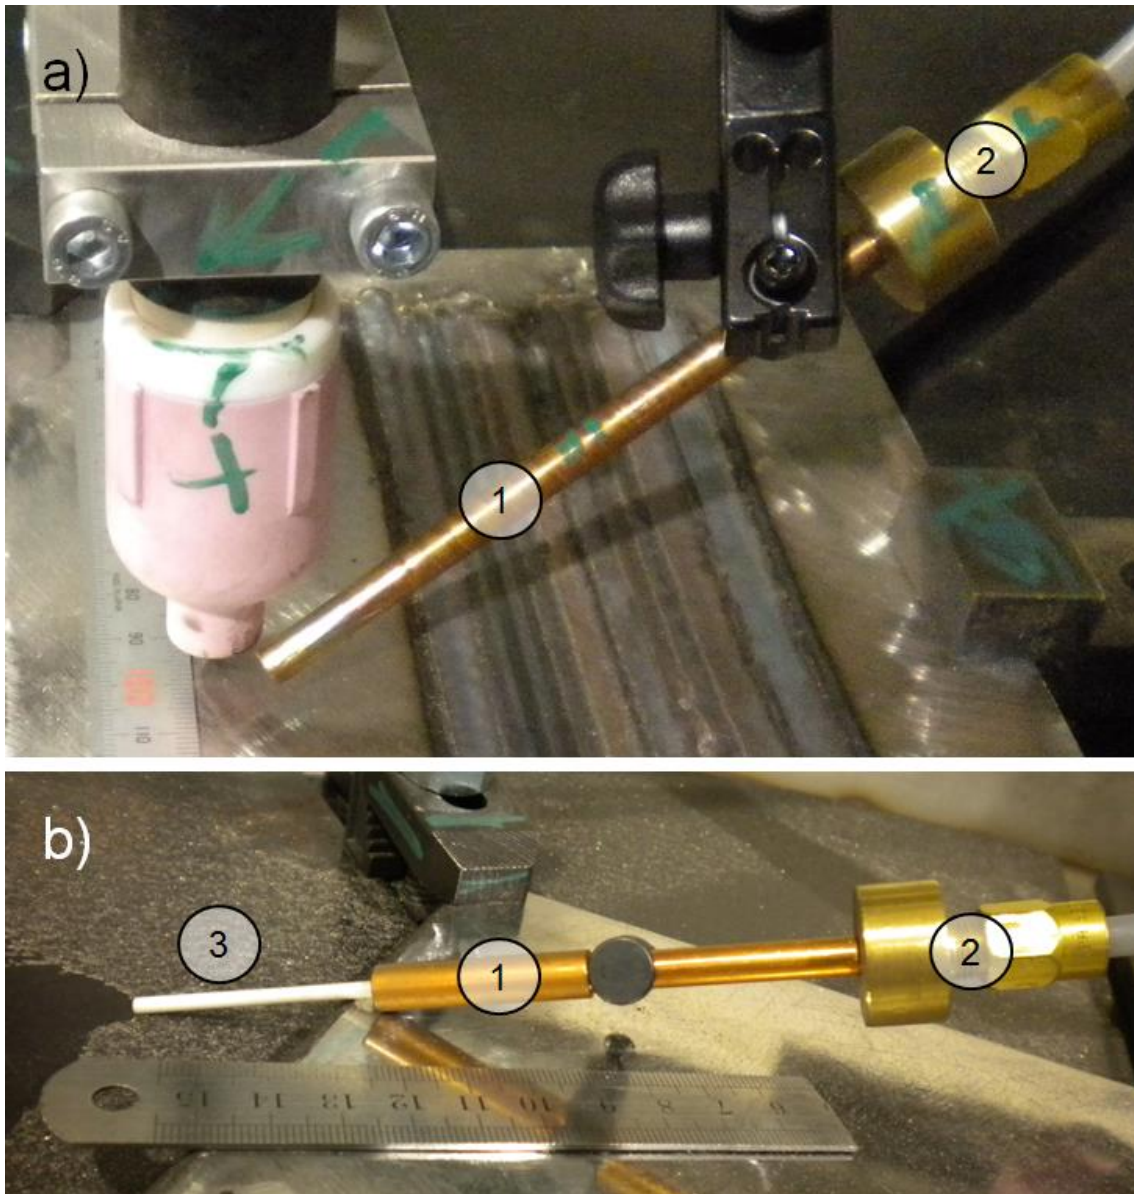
Powder feeder nozzle; a) Cu nozzle mounted next to the torch; b) ceramic nozzle connected at the end of the Cu nozzle; 1 Cu pipe, 2 brass connection to hose, 3 aluminium oxide ceramic pipe.
